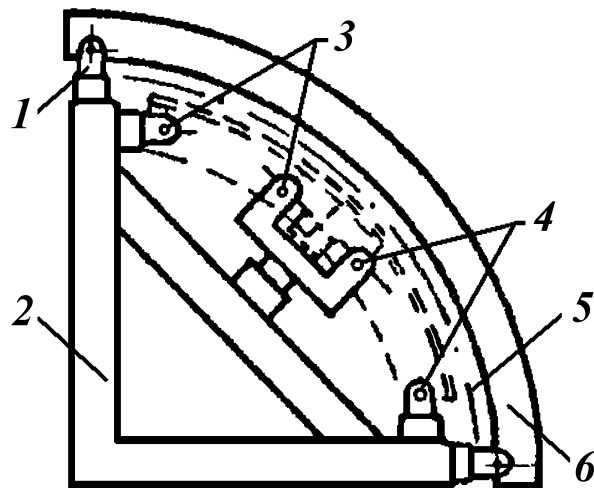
Locating by CFH during section assembling: 1 – fork-shaped conector; 2 – frame; 3 – CFH of the upper panel; 4 – CFH of the lower panel; 5 – theoretical outline; 6 – equidistant template
